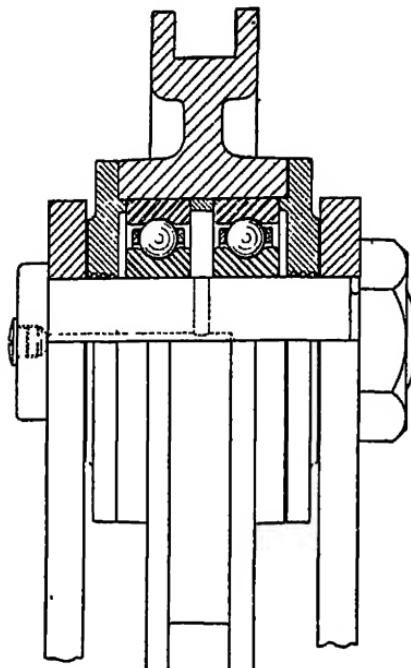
APPLICATION OF BALL BEARING TO A PULLEY WHEEL
